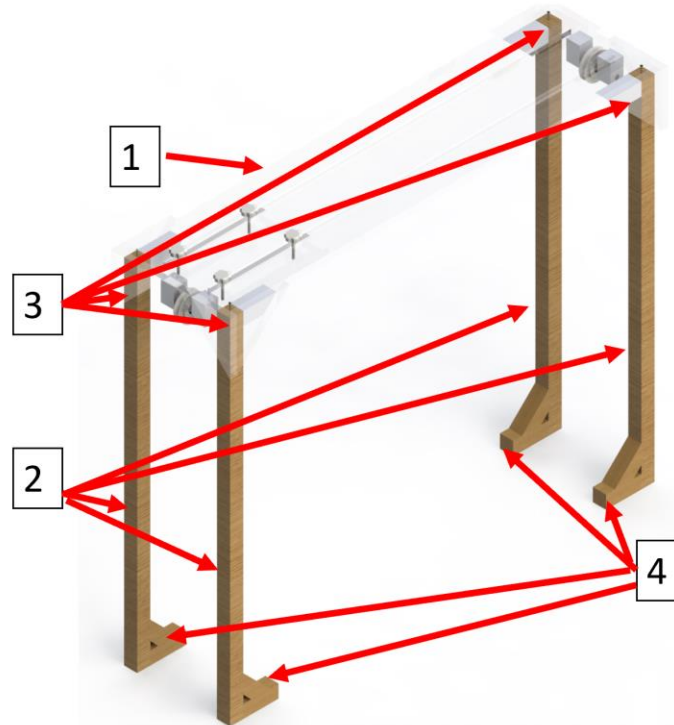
CAD Geometry of Top Support Plate and Vertical Risers Component of Top Assembly
